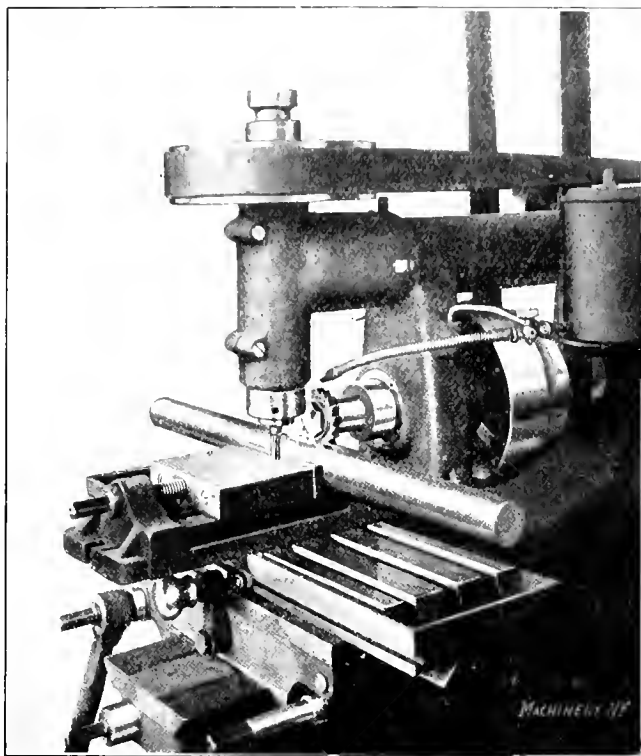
First Operation in milling a Feather Keyseat on the Chicago Duplex Milling Machine
